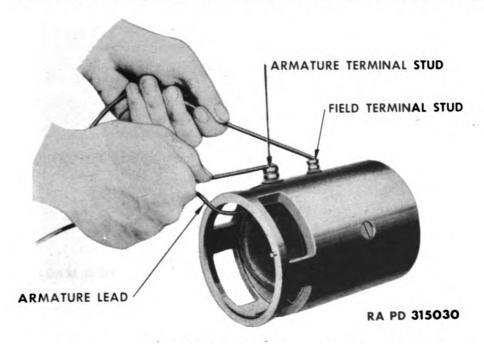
Testing Field Coils for Open Circuit with Test Probes— Group 2A Generators
